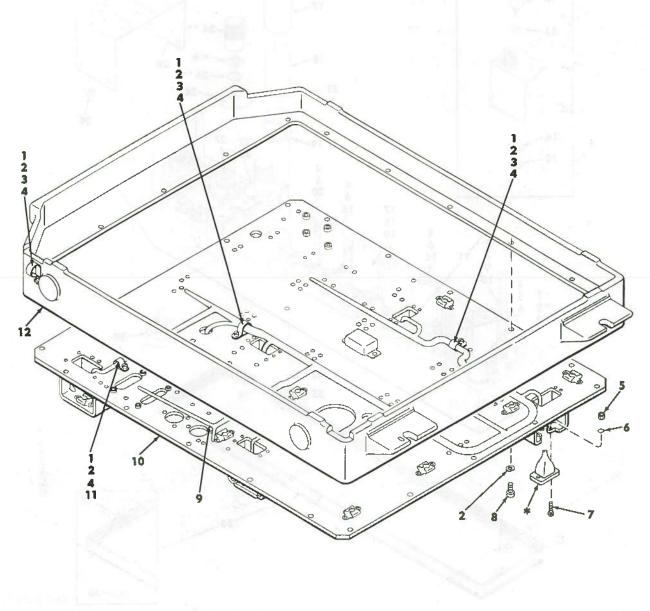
CONTROL-POWER SUPPLY GROUP /10664268/-PARTIAL EXPLODED VIEW
